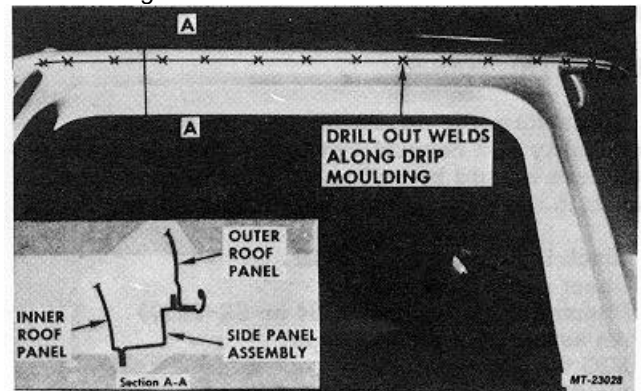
Side Panel to Outer Roof Panel Spot Welds
